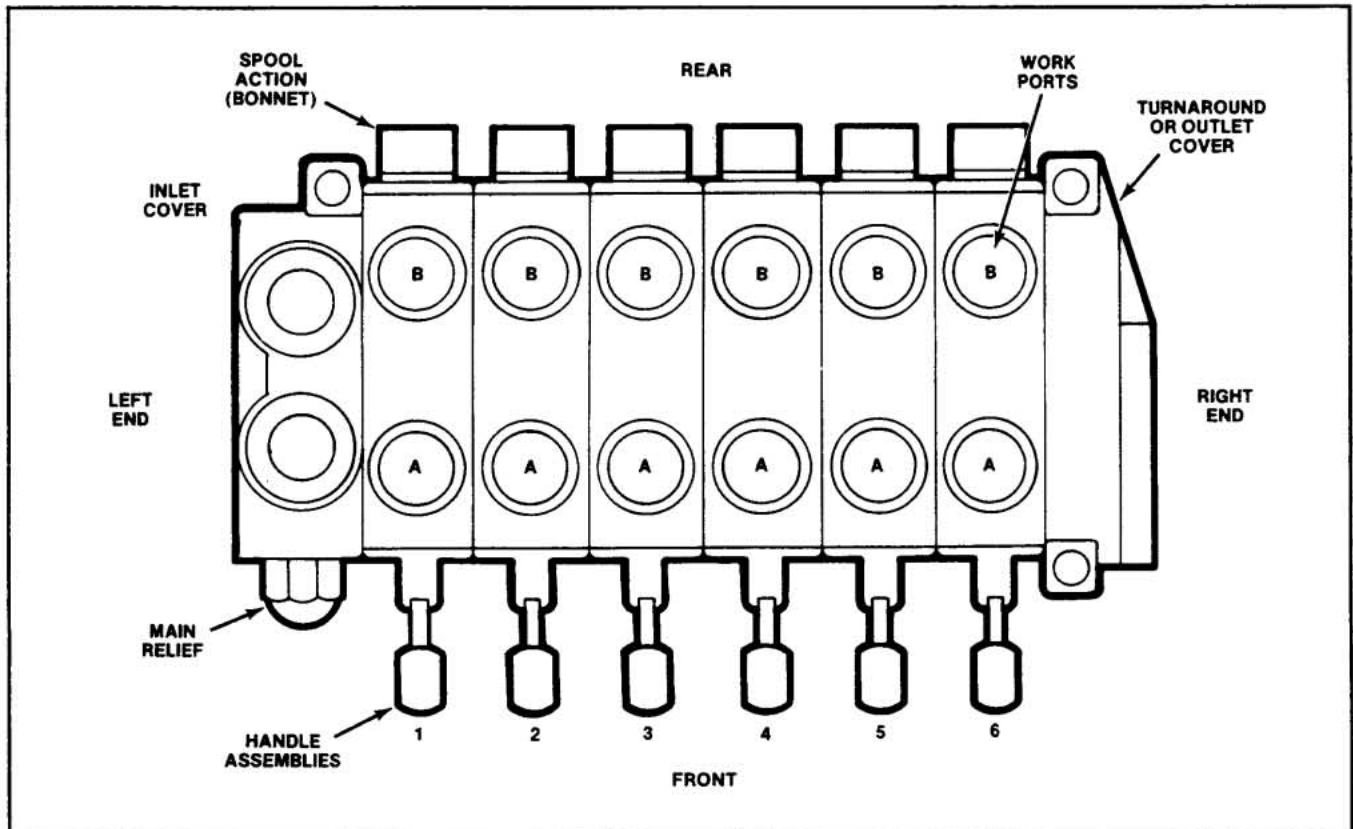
Schematic-View of Typical Control Valve Assembly.
